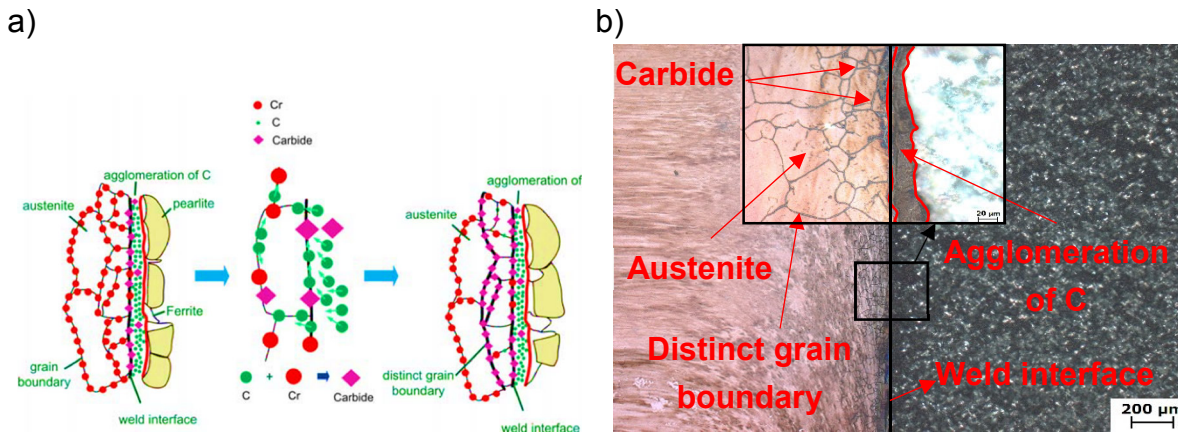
a) Schematic illustration of the diffusion process at the weld interface of stainless steel to carbon steel joints after PWHT [147] and b) Morphology of carbides and C agglomeration at the weld interface of the joint on AISI 316L side at 1050 °C/30 min. WQ
